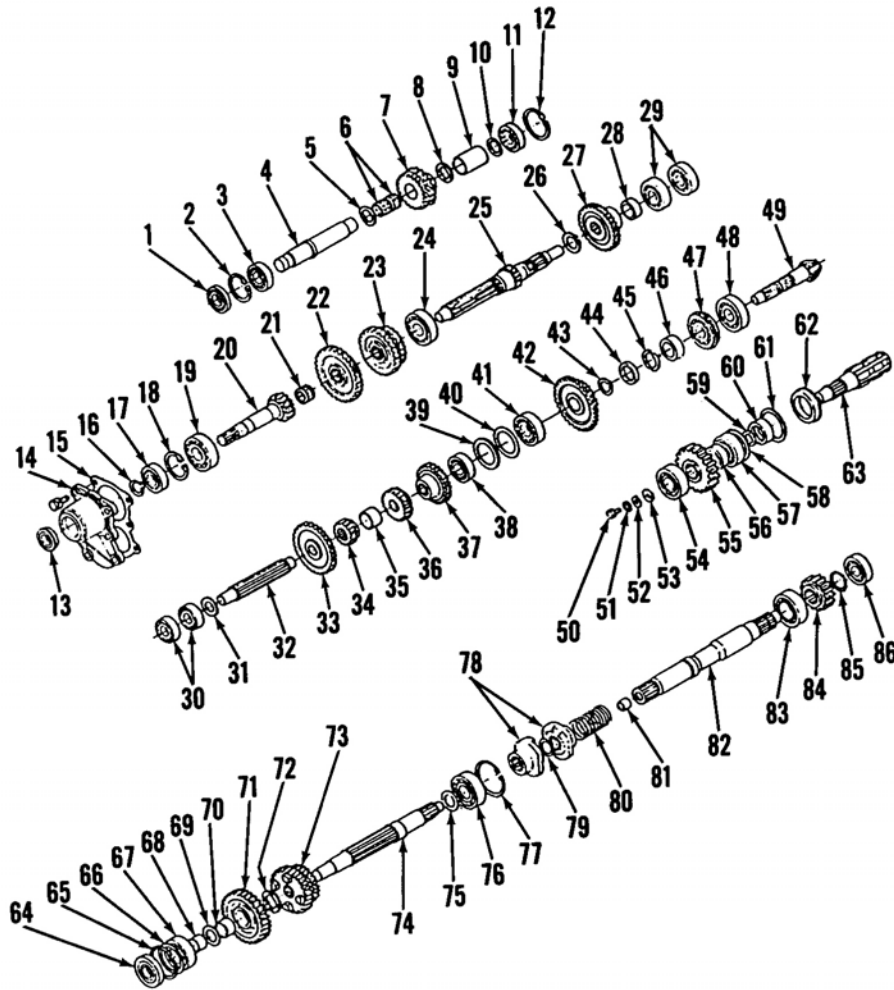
Exploded view of transmission gears, shafts and other components used on Model B6100E.
